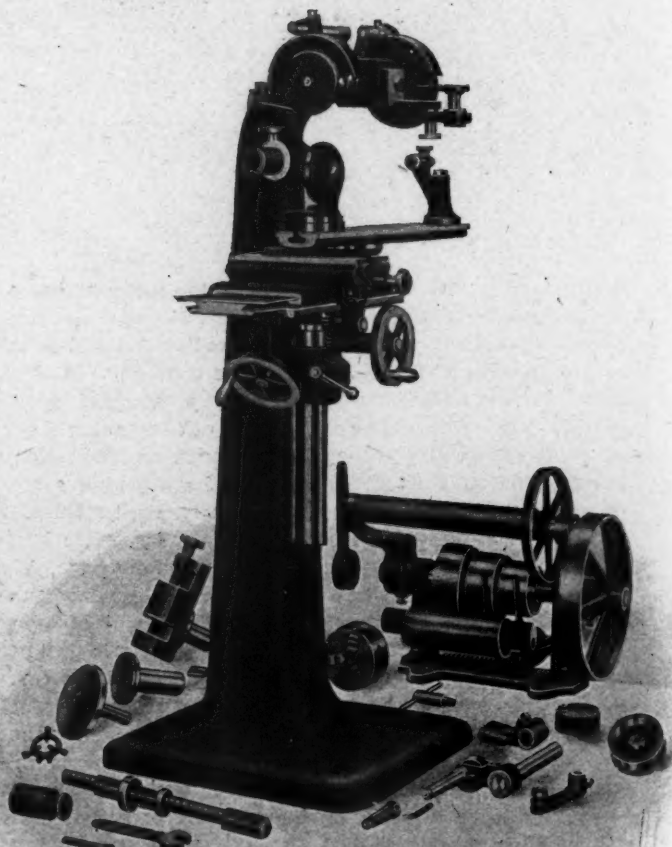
MILWAUKEE UNIVERSAL CUTTER AND TOOL GRINDER.
